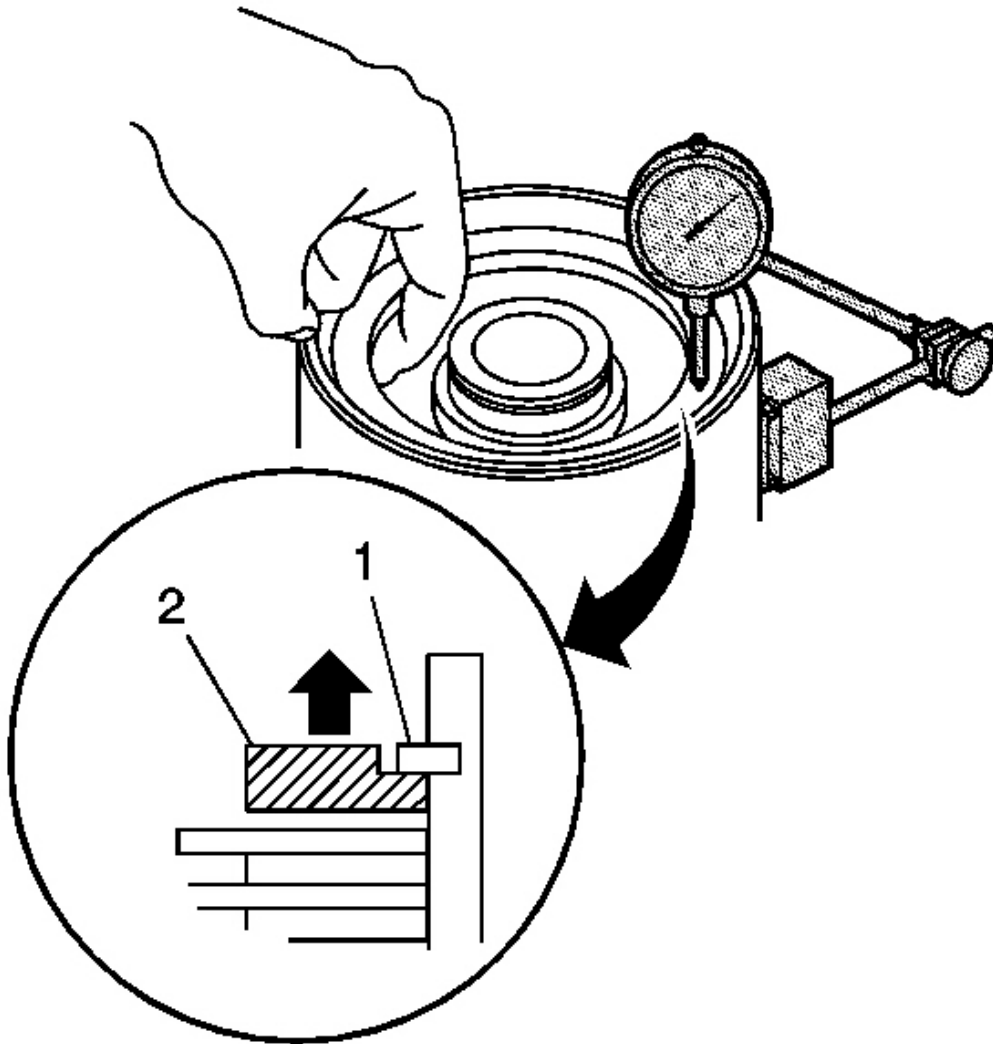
Measuring The Clutch Assemblies Clutch Backing Plate Clearance
